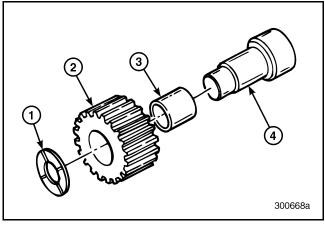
Exploded View of Reverse Idler Gear Assembly
